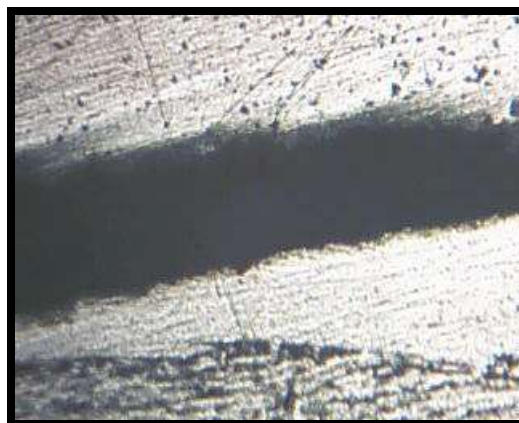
tunnel defect during FSW at 10 mm/min welding speed.
